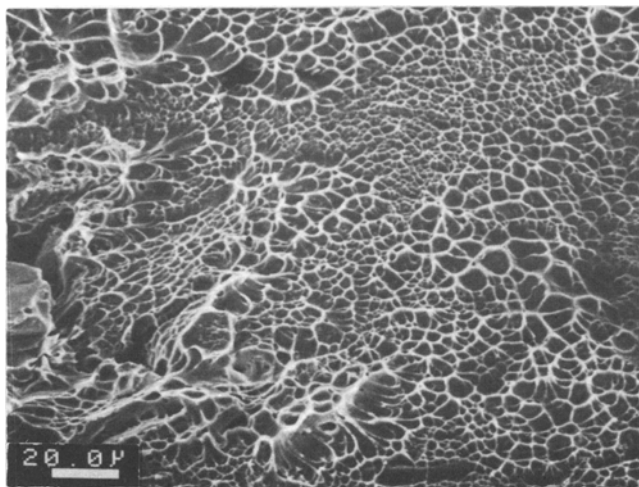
SEM fracture surface of vessel 2 exhibiting a ductile fracture.
